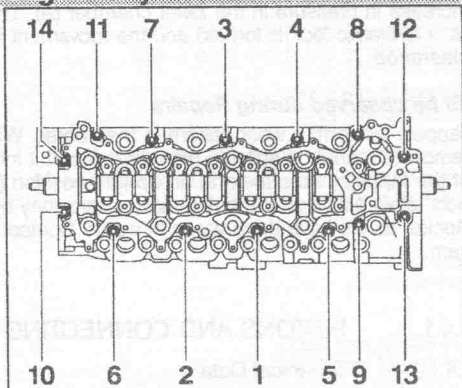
The camshaft housing bolts are tightened in the sequence shown (DK5 engine).
